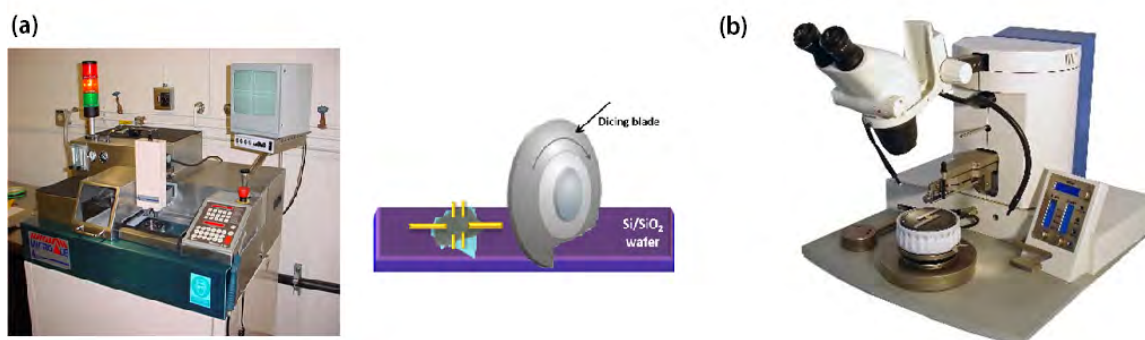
(a) Left: photograph of dicing machine available at the clean room facility AIME. Right: Dicing of the wafer with an accurate blade. (b) Photograph of the wire bonding machine used during this work.
